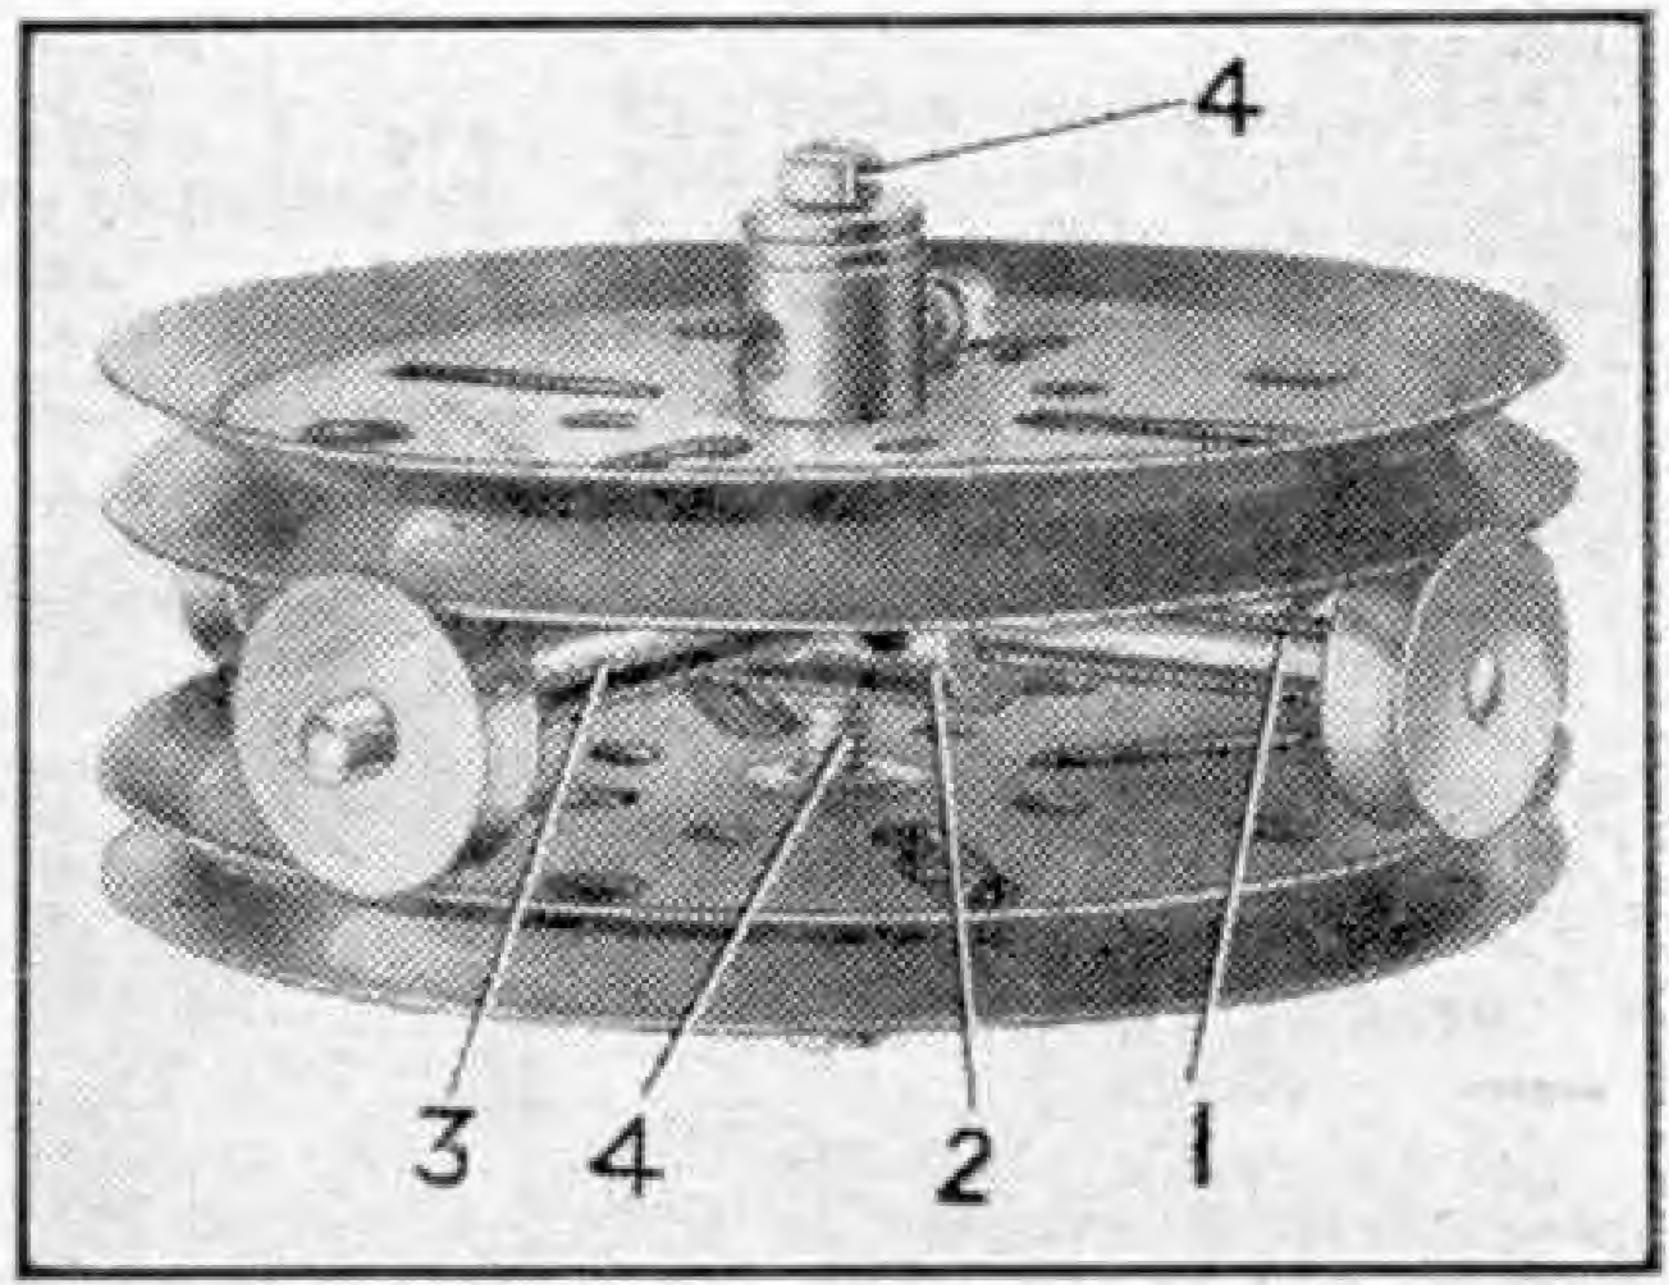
A simple roller bearing that can be used as an alternative to the ball bearing seen in Fig. 1.
